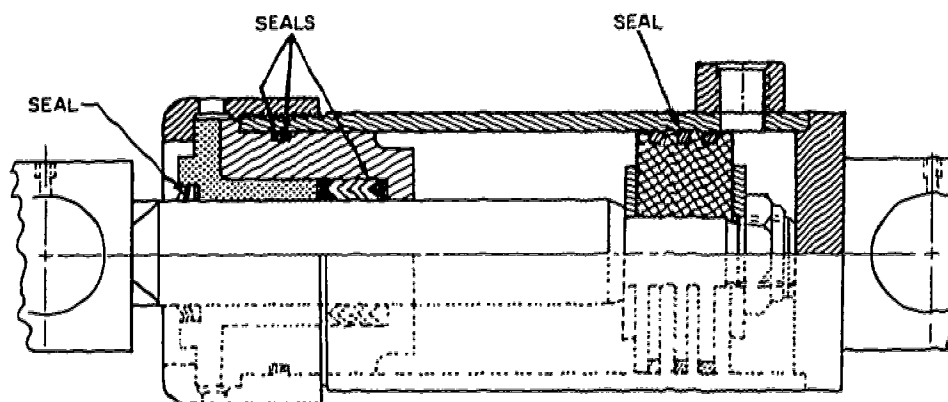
Location of seals in a typical hydraulic cylinder.
